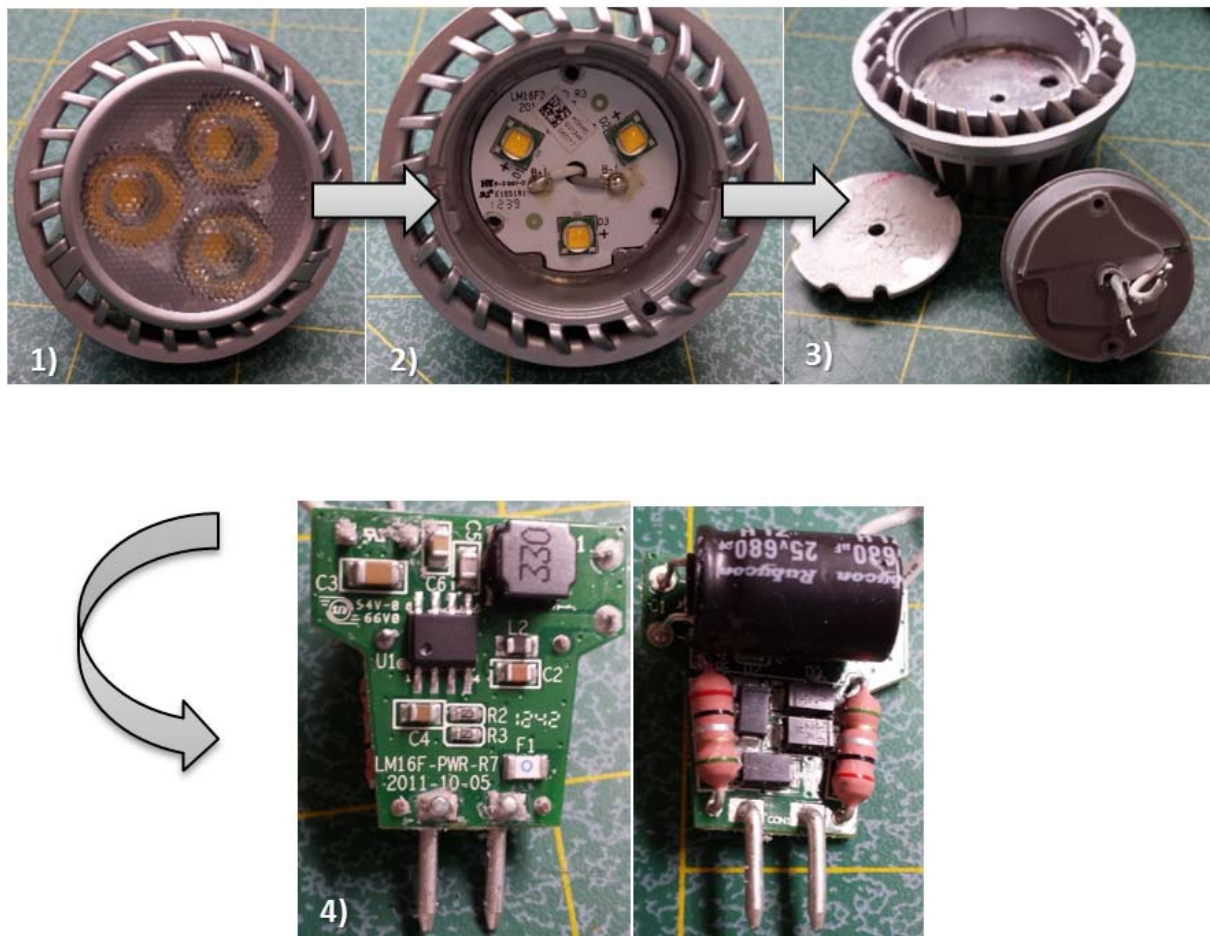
Lamp deconstruction: 1) Lens removed. 2) LED board leads de-soldered. 3) Driver board encased in potting compound removed from heat sink. 4) Potting compound removed, both sides of board illustrated.
